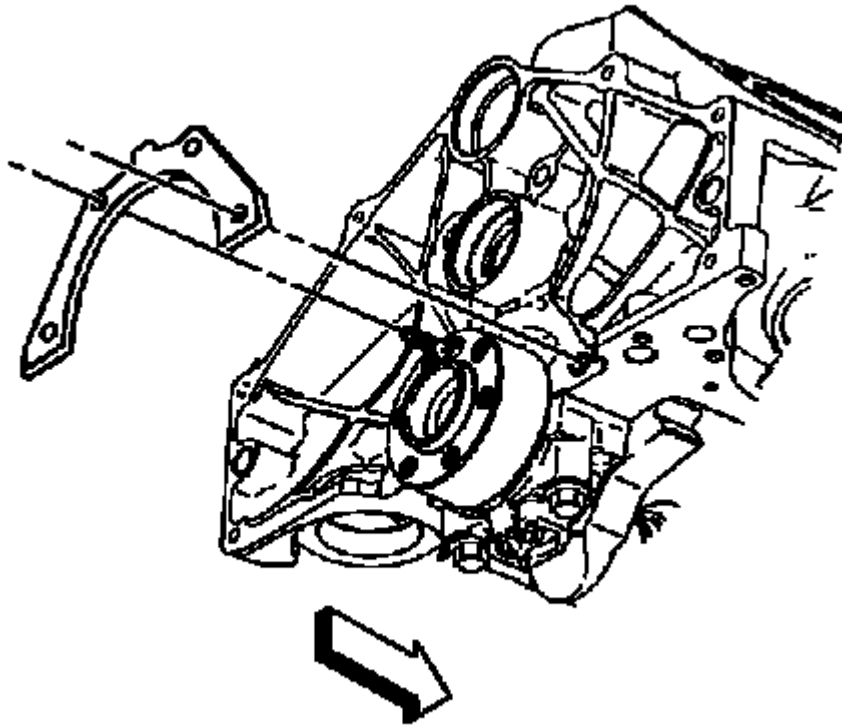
Identifying Crankshaft Rear Oil Seal Housing Gasket
